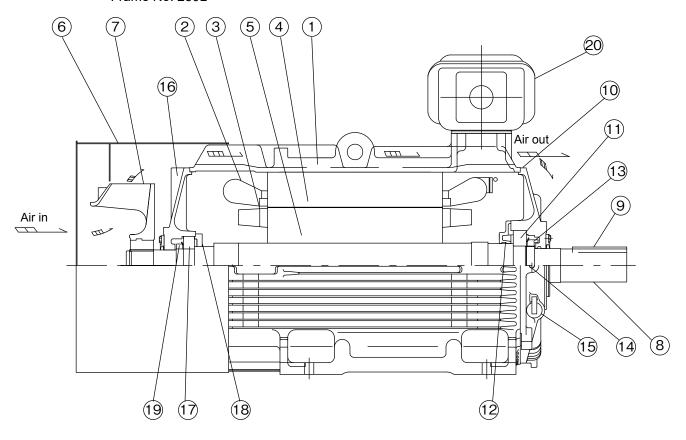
Section Drawing of Horizontal foot mount (Frame size 280L)
